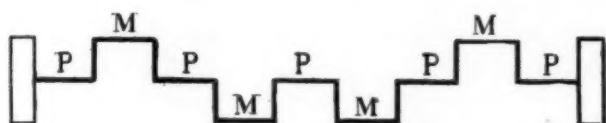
Arrangement of Four-Throw Crankshaft for Antoinette Eight-Cylinder Engine.
